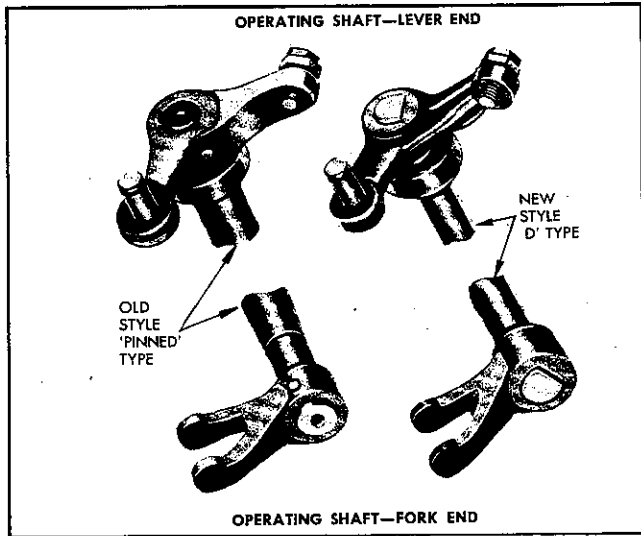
Comparison of New and Old Style Shaft and Lever Assemblies.
